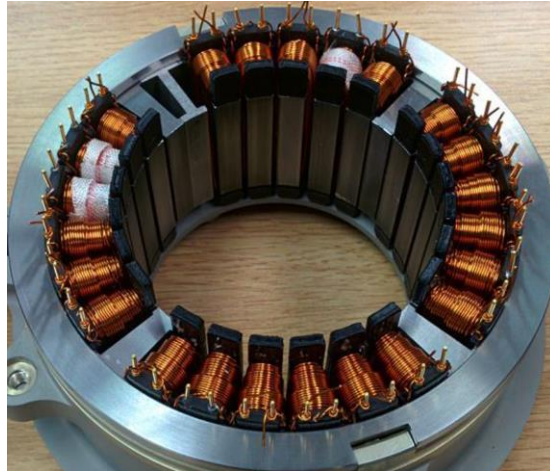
P1 stator during assembly, prior to inserting in machine casing.
